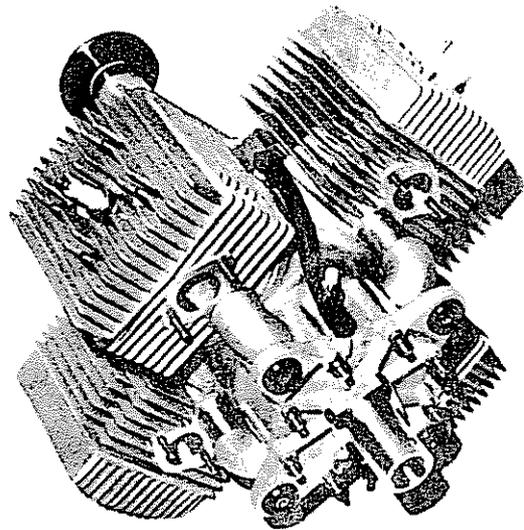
Rear view, first prototype less ignition and exhaust system
